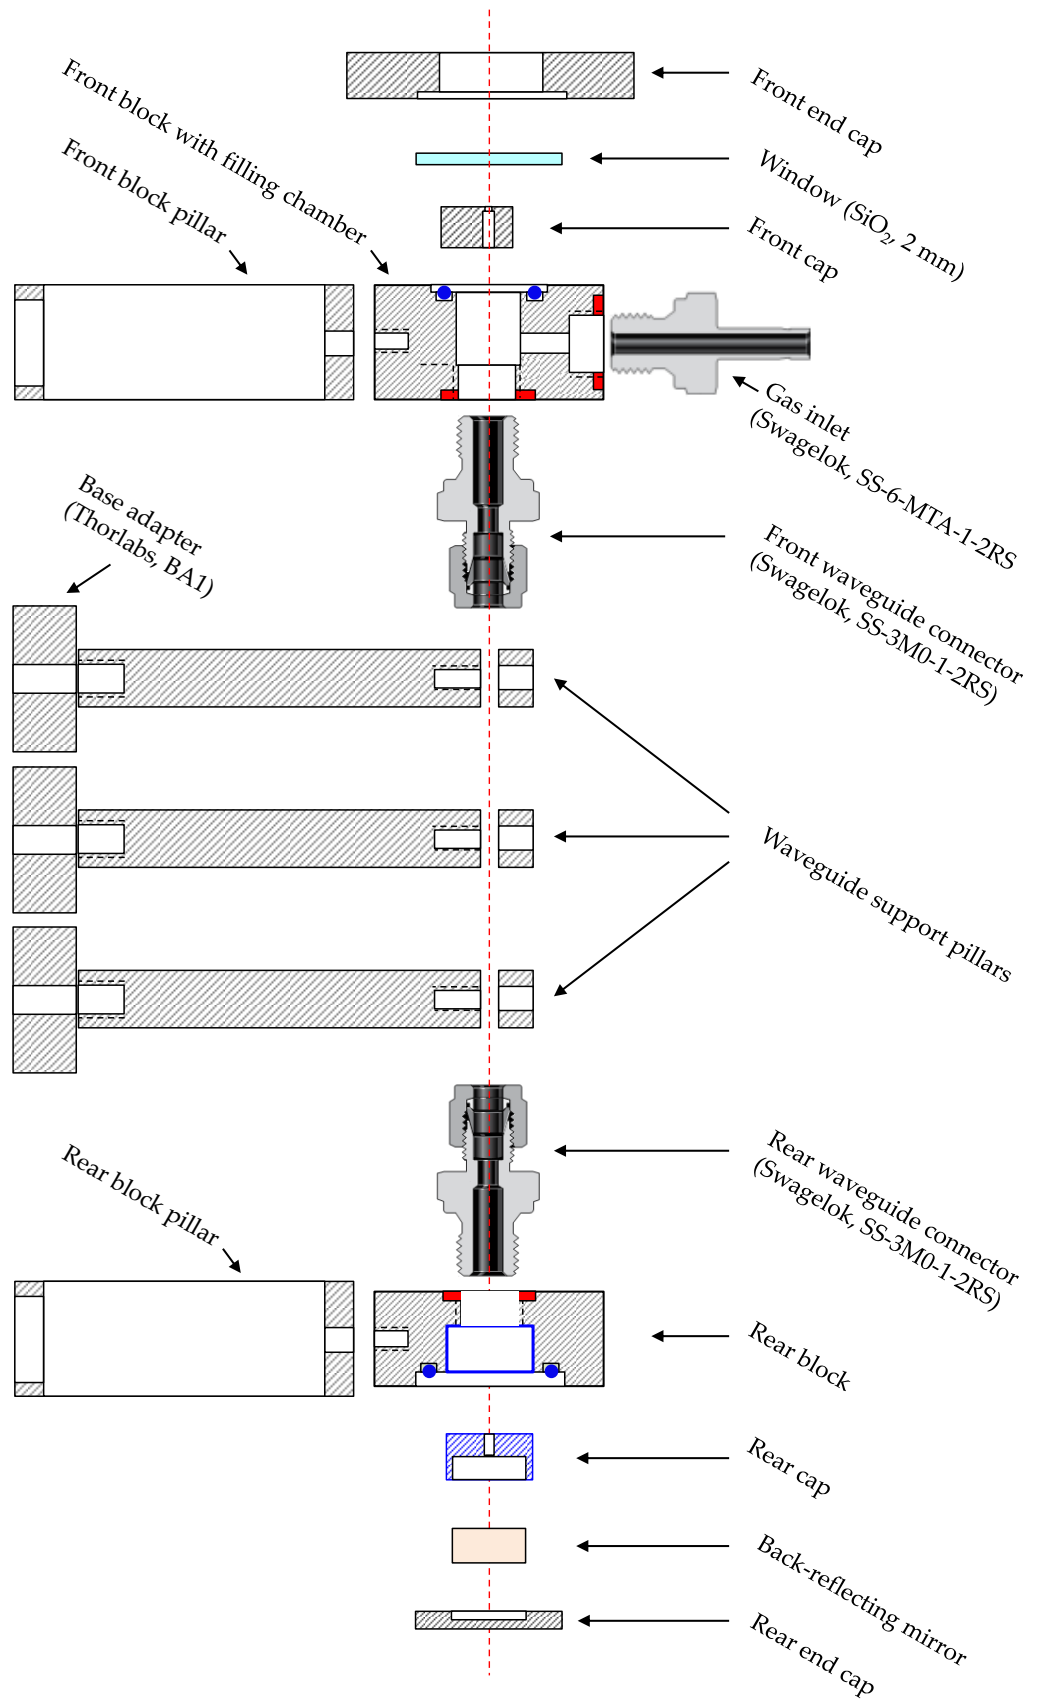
Schematic drawing of the prototype gas cell. Exploded component view. The dimensions of all components are true to scale (approximately 1:1.4); only the thickness of the copper sealings (drawn in red) between the front/rear block and the Swagelok connectors is increased in this drawing for better visibility (real thickness: 0.5 mm). The blue circles at the front and rear block facing the respective end caps represent O-ring seals. Note that the waveguide itself is not included in this drawing. It is inserted in a stainless steel tube with an inner diameter of about 1.7 mm, which is connected at each end to the front and rear block by the copper-sealed Swagelok connectors shown in the drawing (cf. figure 4.2).
